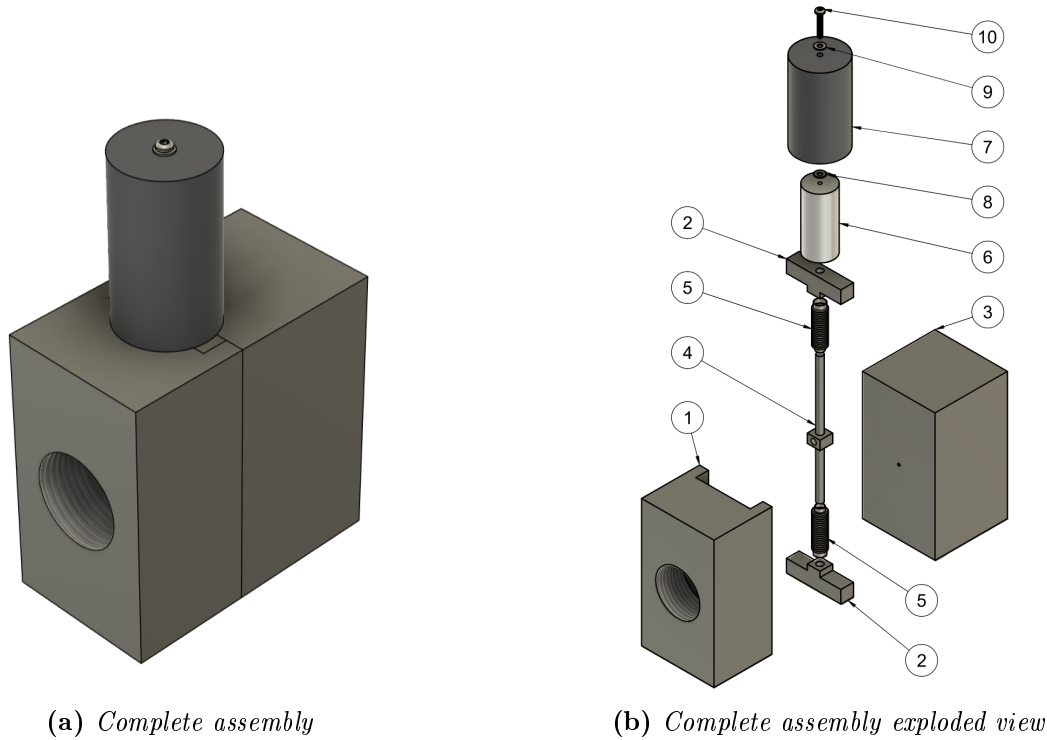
Overall PTCD assembly and exploded view highlighting internal components.
